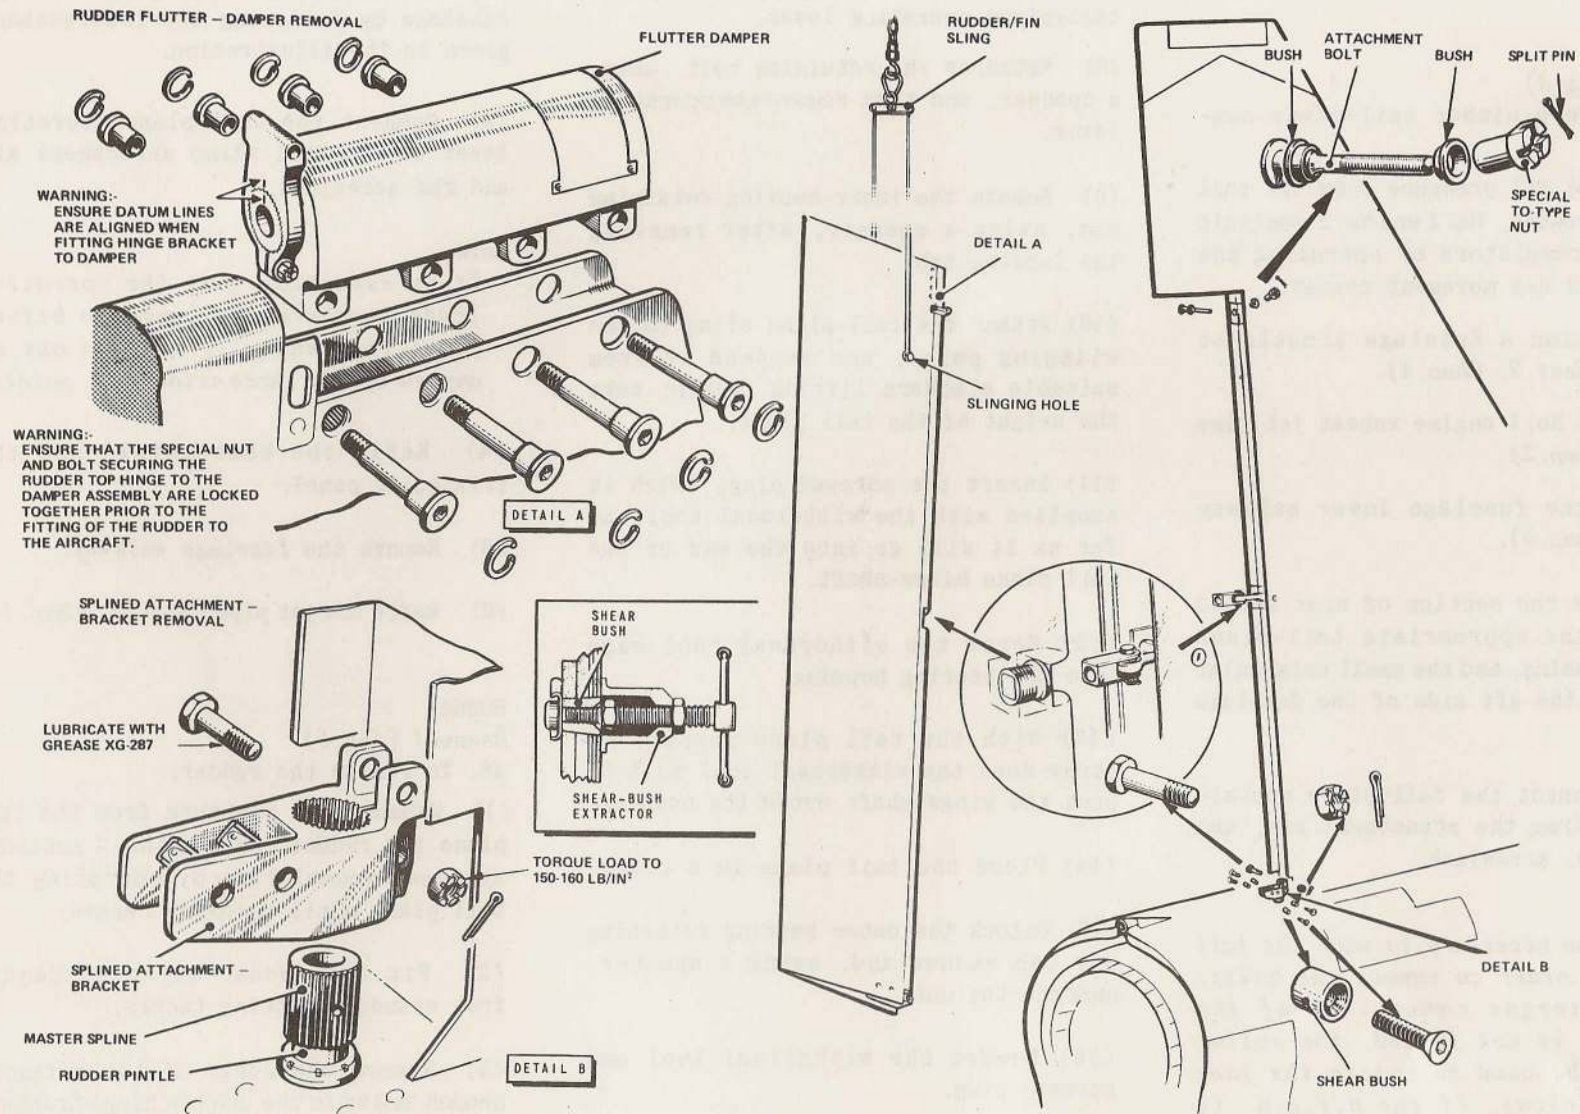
RUDDER-REMOVAL AND ASSEMBLY
